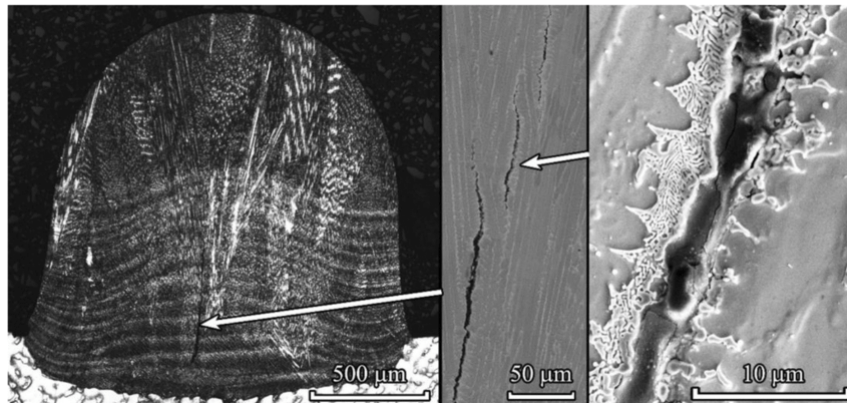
Crack formed during additive manufacturing [31].
